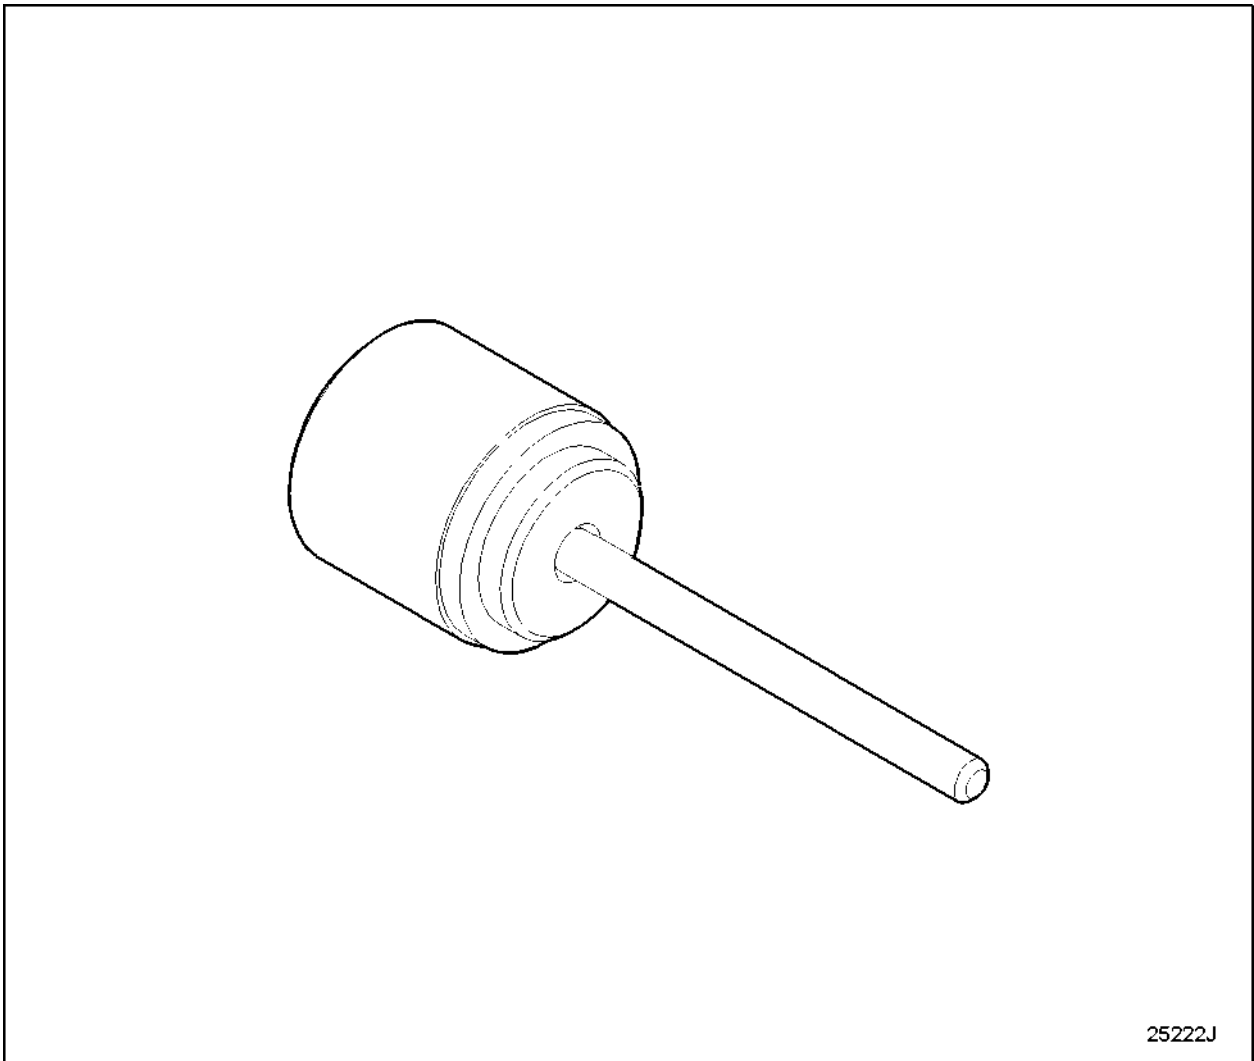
Valve Seat Insert Installer, Intake,J 41585
